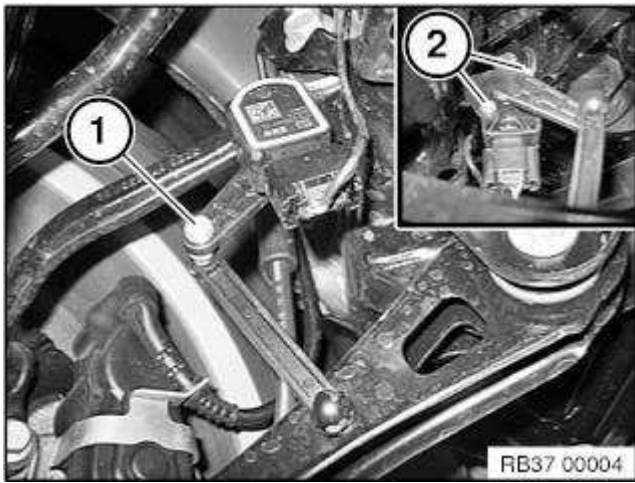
Release Nut (1) And Disconnect Jointed Rod
